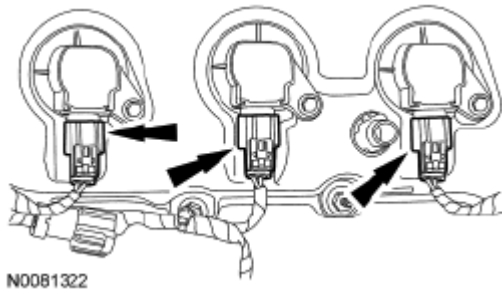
Locating RH Coil-On-Plug Electrical Connectors
